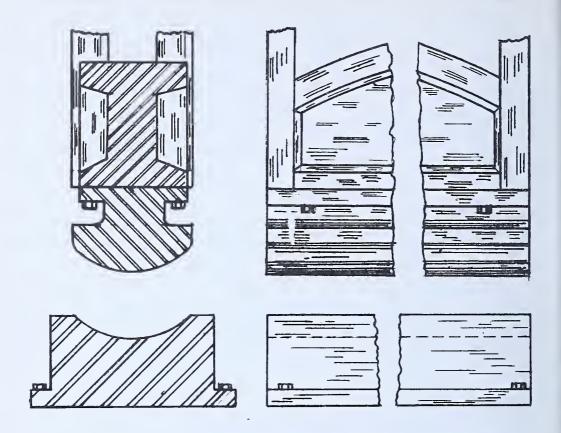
Curved Dies Bolted in Place on Keel Bender
